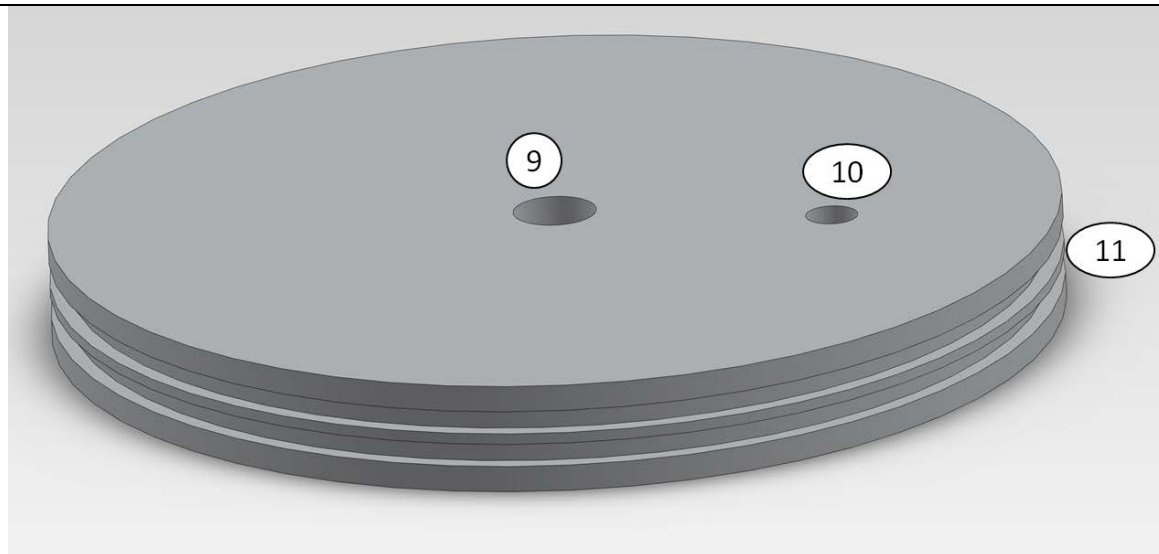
CAD Rendering of Lower Oxidizer Tank Bulkhead
